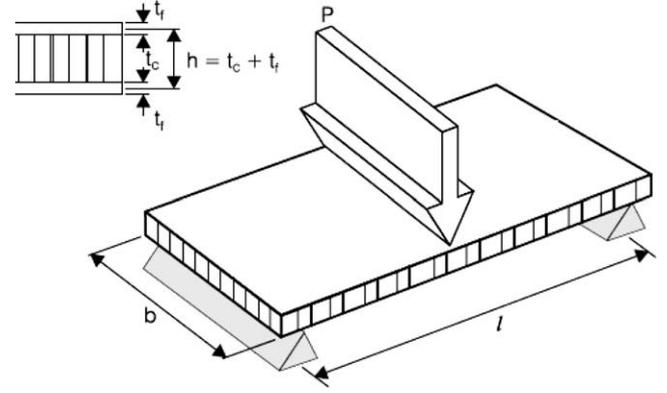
Sketch of a sandwich beam under three-point bending showing geometrical parameters.
